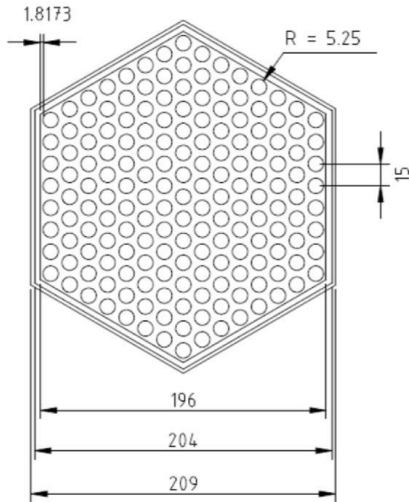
ELFR assembly, dimensions in (mm) (Grasso et al., 2013b).
